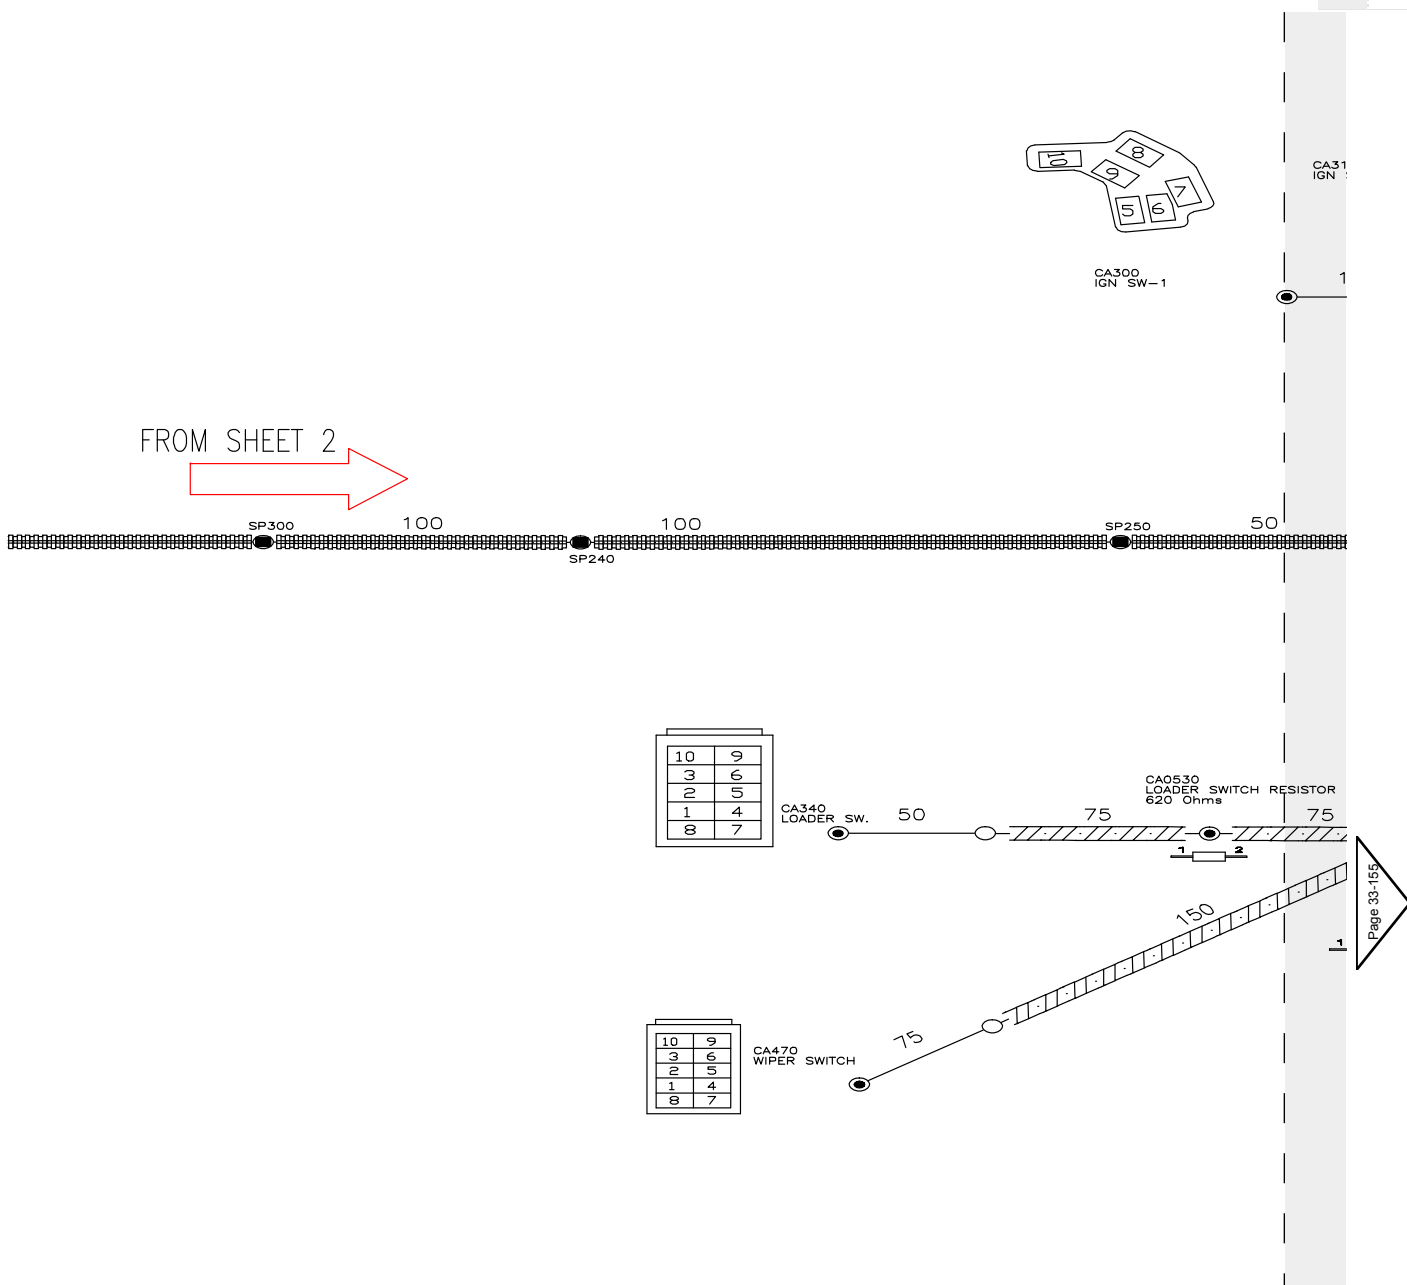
Cab Harness - Creep and Road Lights 334/Y9887 Issue 3 (Sheet 6 of 6)
